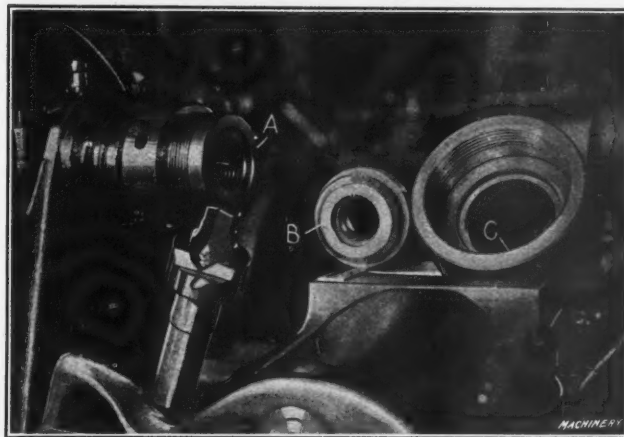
Chuck used for holding Combination Blanking, Cupping and Drawing Die Blank when machining the Hole
